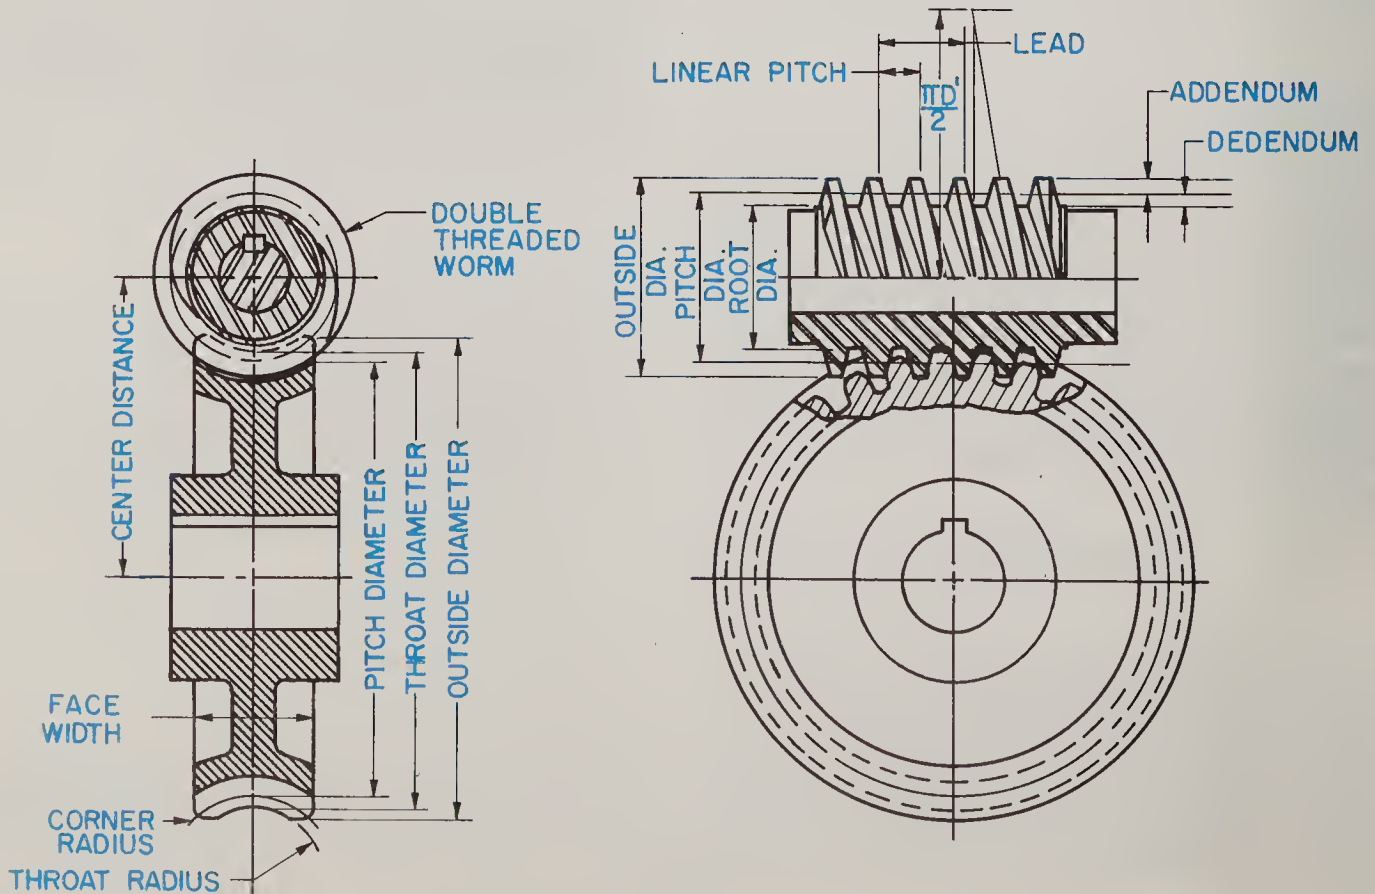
Worm gear and worm. (Western Gear Corp.)
